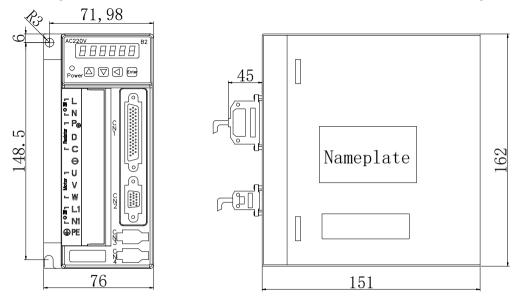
Front figure of WD-15B2 series installation dimension Side figure of WD-20B2, WD-30B2 series installation dimension, as shown in fig. 3-2.
